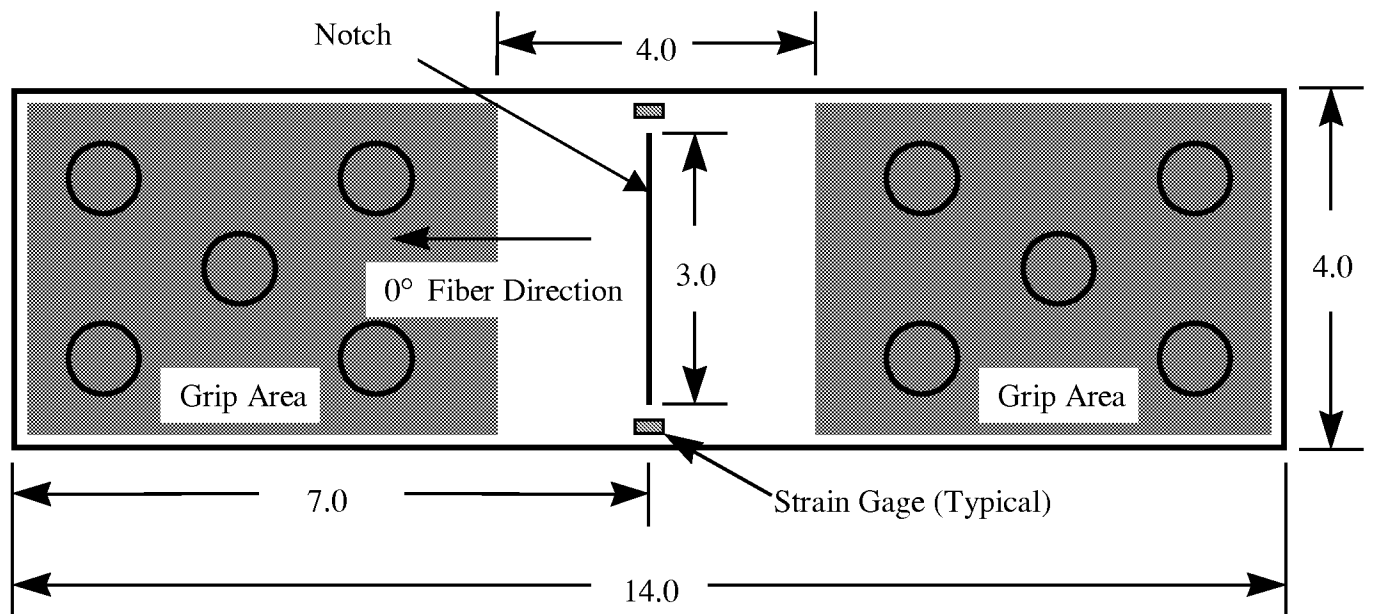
Center notch combined bending and tension specimen geometry (Dimensions in inches).
